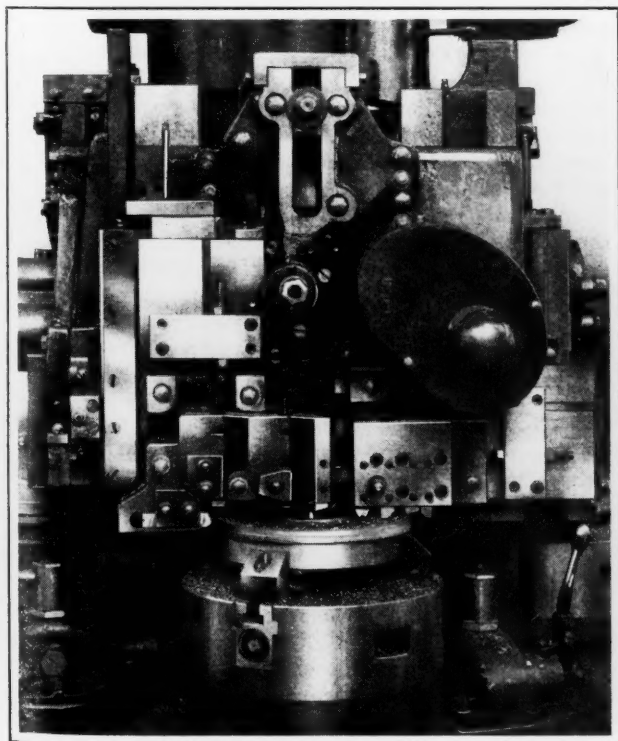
Third Unit of the Continuous Machine—finishing the Engine Side
